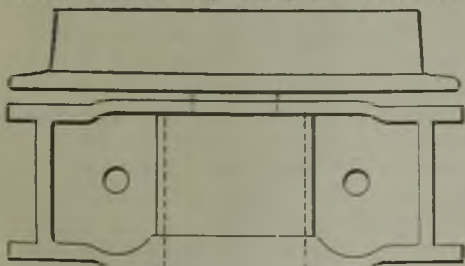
Original Arrangement of Bearing Housing and Wheel
